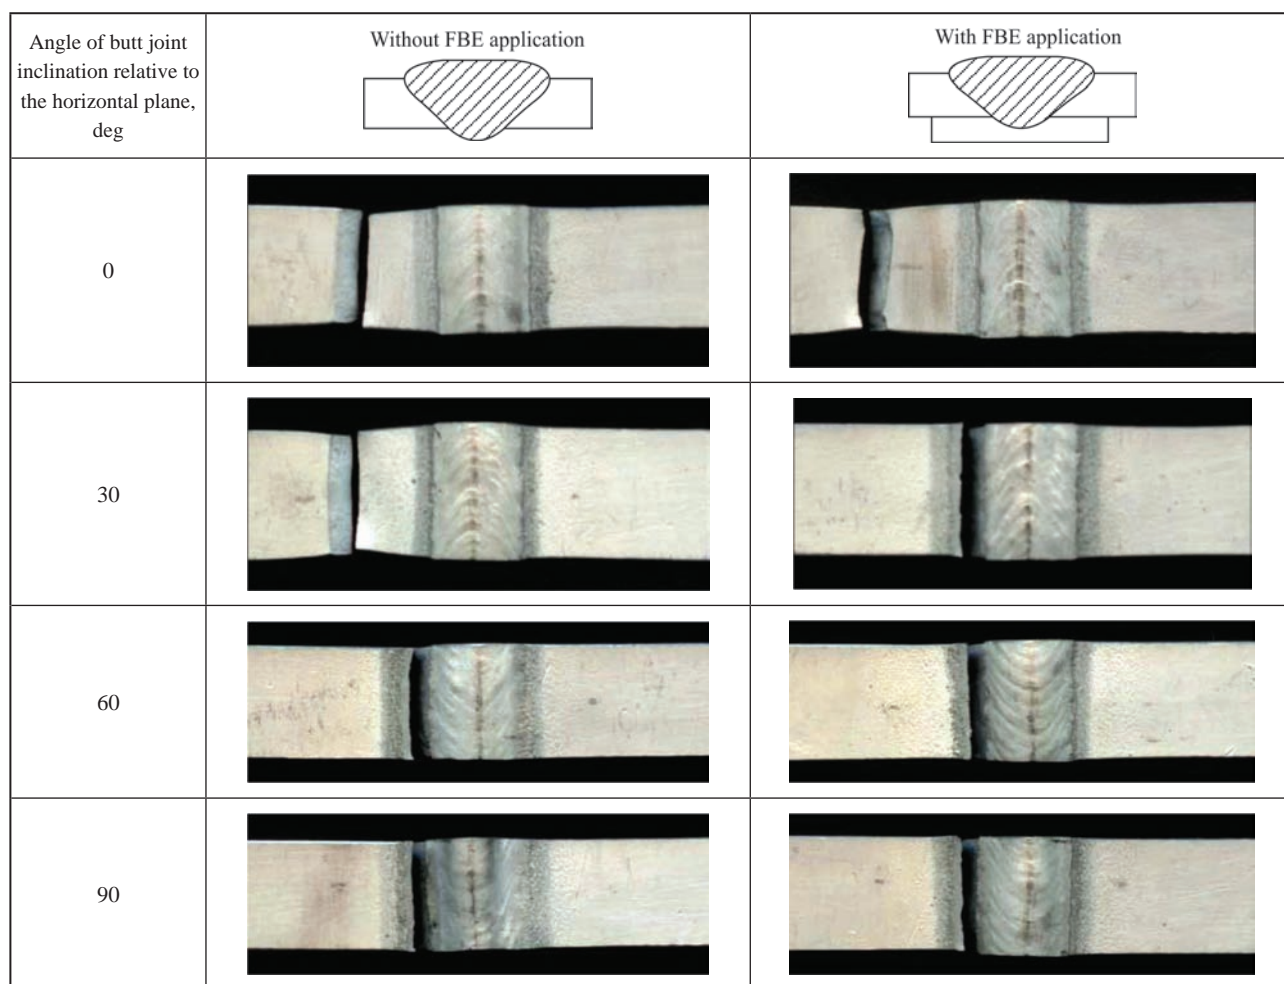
Fracture mode of welded joints of 4 mm AMg5M alloy produced by CEPAW in different positions with FBE and without it
